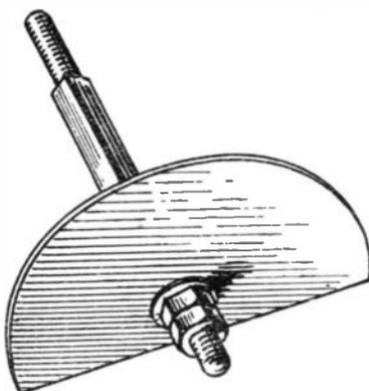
Method of assembling moving vanes upon a square centre spindle.
